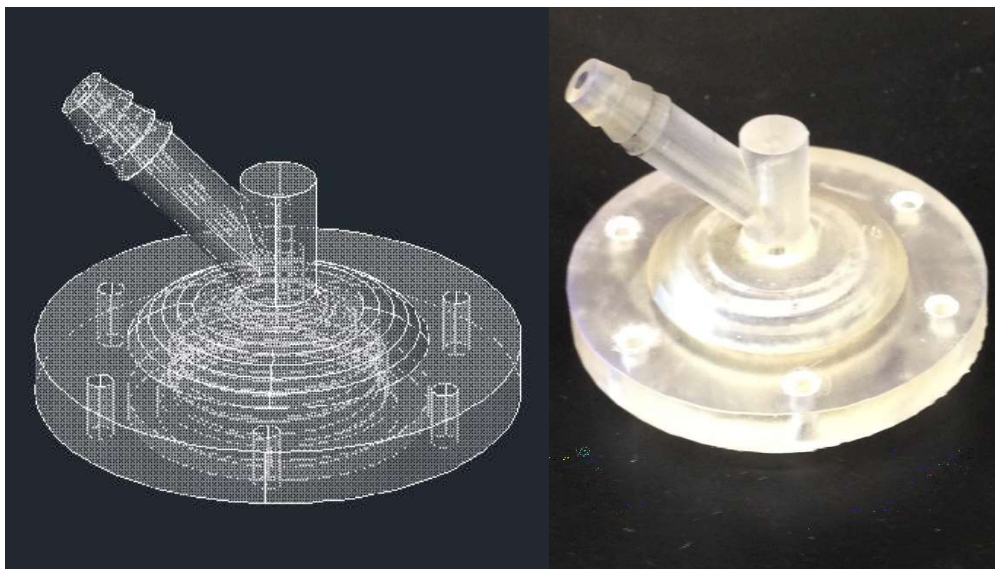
Reaction vessel top. Left – CAD design Right – 3D printed object.
